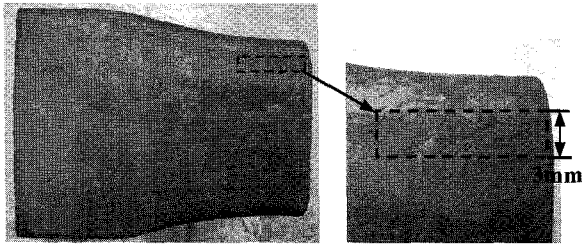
Surface crack on workpiece after 1<sup>st</sup> pass(box groove)
